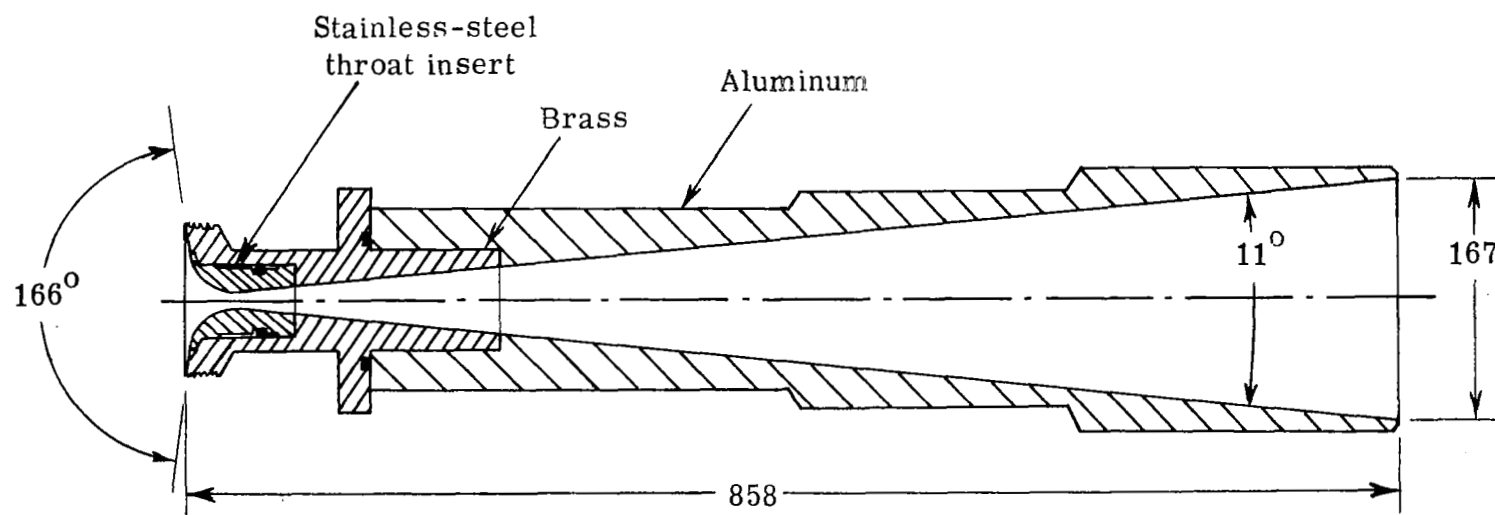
Section Through Conical Nozzle. 1/5-Size. Dimensions in mm.
